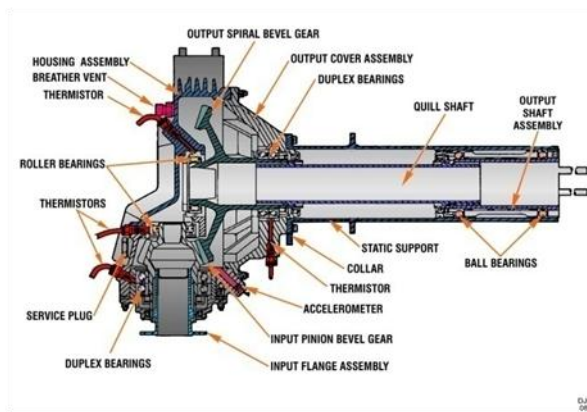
Internal components of an AH-64 tail rotor gearbox
